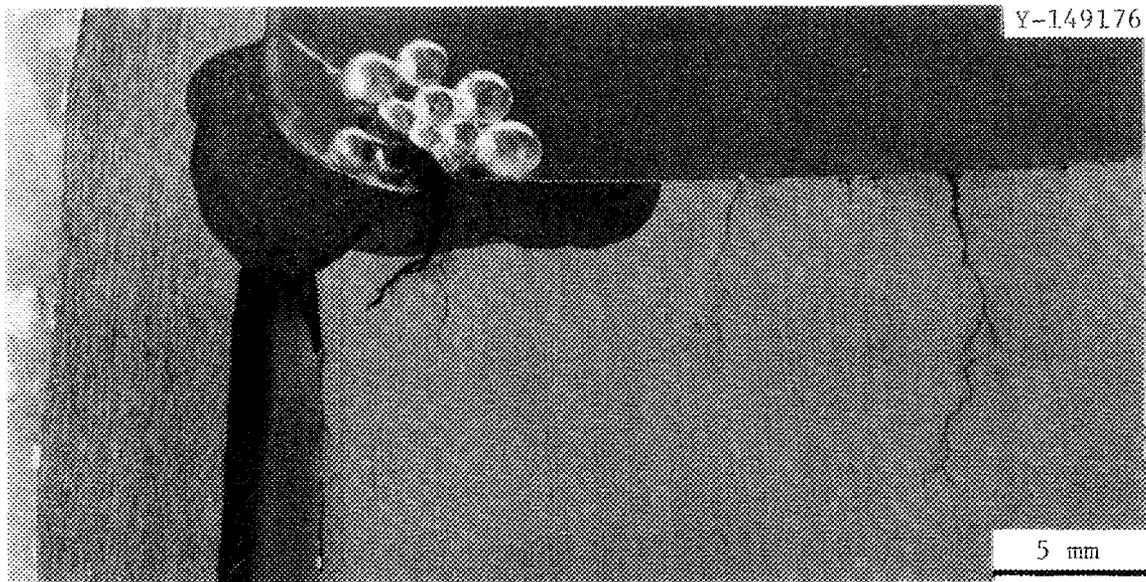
Cross Section of Type 316 Stainless Steel Blind Flange and Thermowell Showing Cracks Through the Weld and in Areas Away from the Weld. Residual stresses resulted from the weld repair and subsequent grinding.
